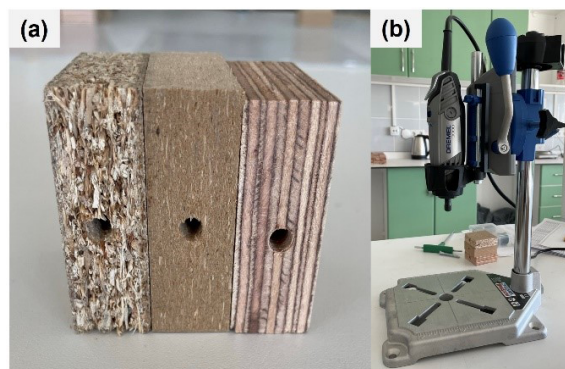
(a) Plywood, MDF and PB boards; (b) Dremel drill
